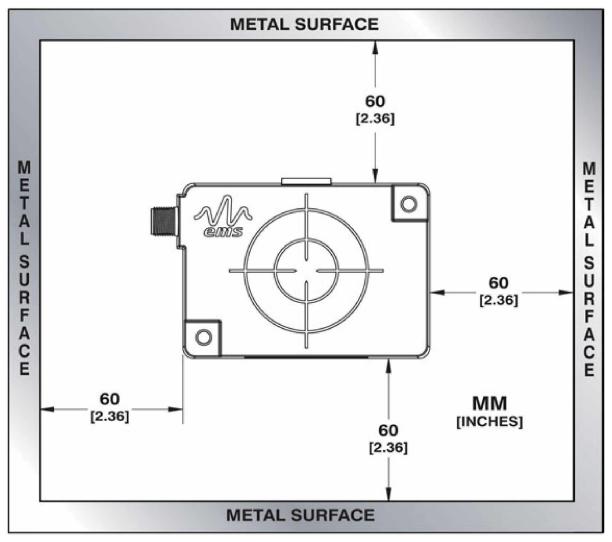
Mounting the Controller Near Metallic Surfaces
